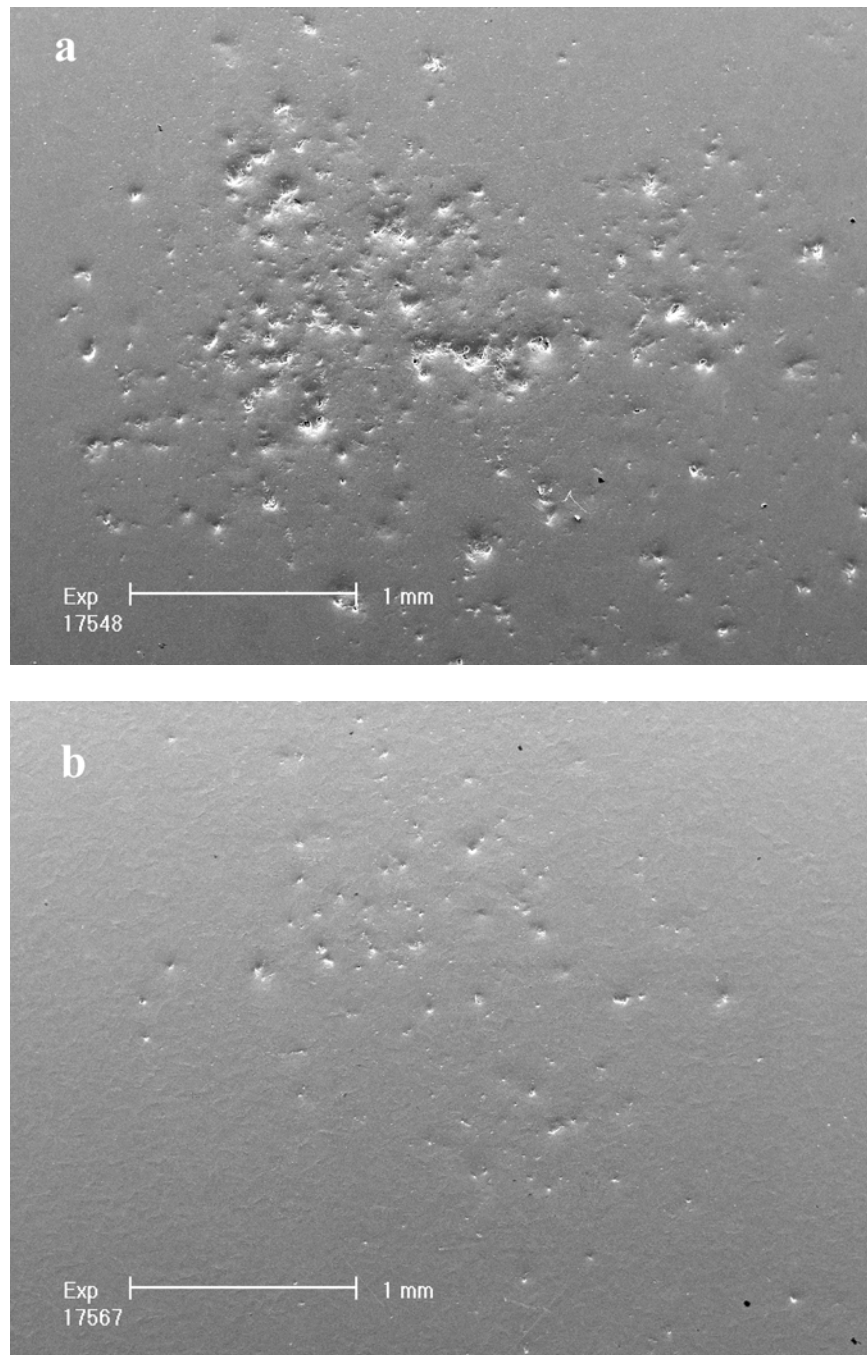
(a) LE3 rear flange and (b) LE4 rear Kolsterised flange, heavily damaged region.
